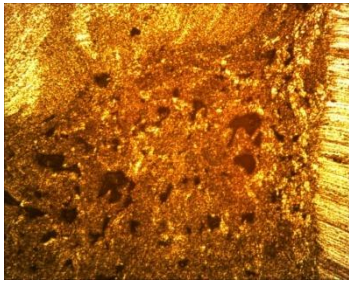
(a) Pin hole defect formed in low spindle speed
